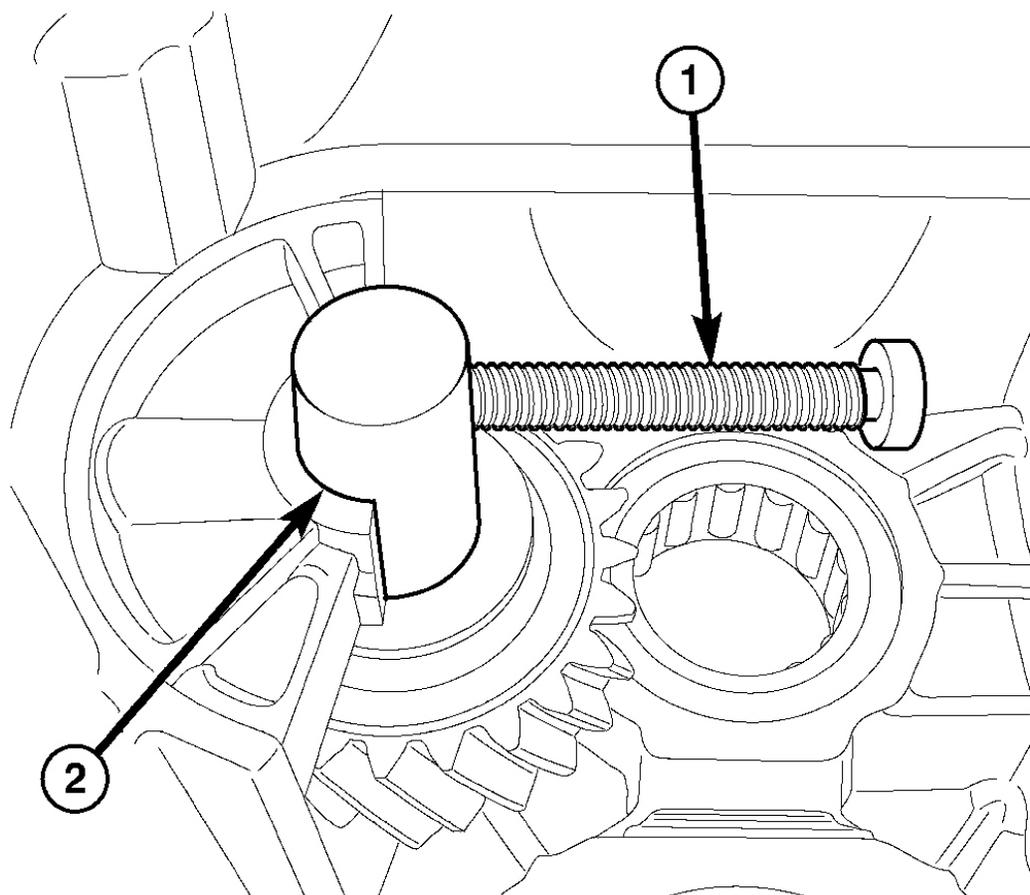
Identifying Reverse Idler Gear Shaft Bolt & Housing
